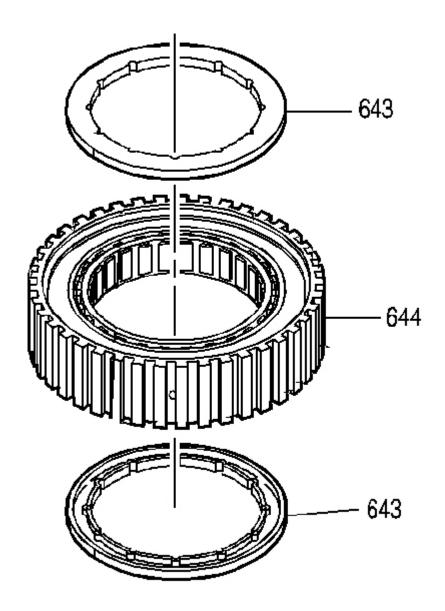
Locating Overrun Clutch Courtesy of GENERAL MOTORS CORP.
